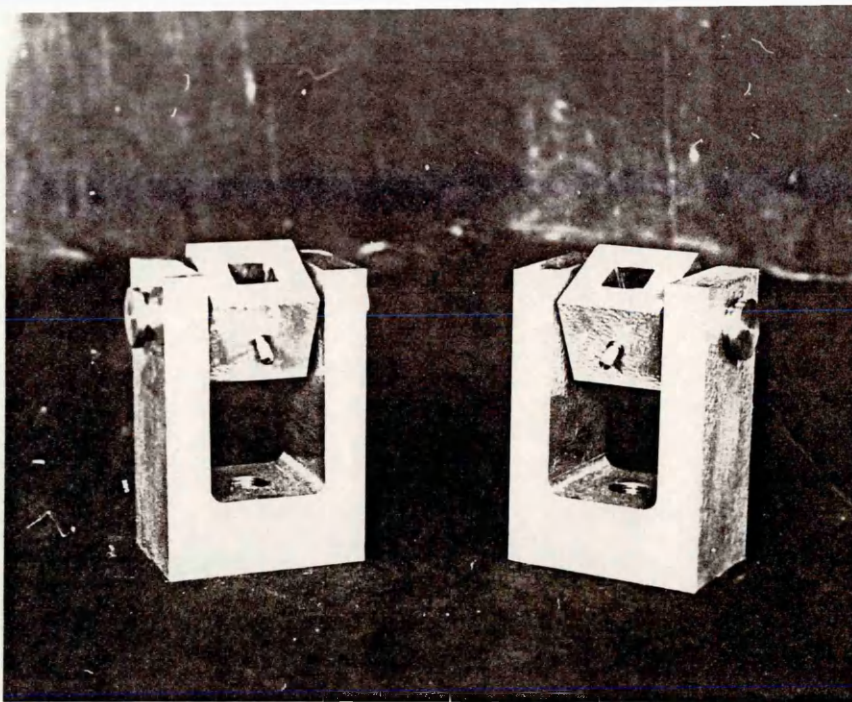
(a) Photograph of thick adherend specimen loading blocks
